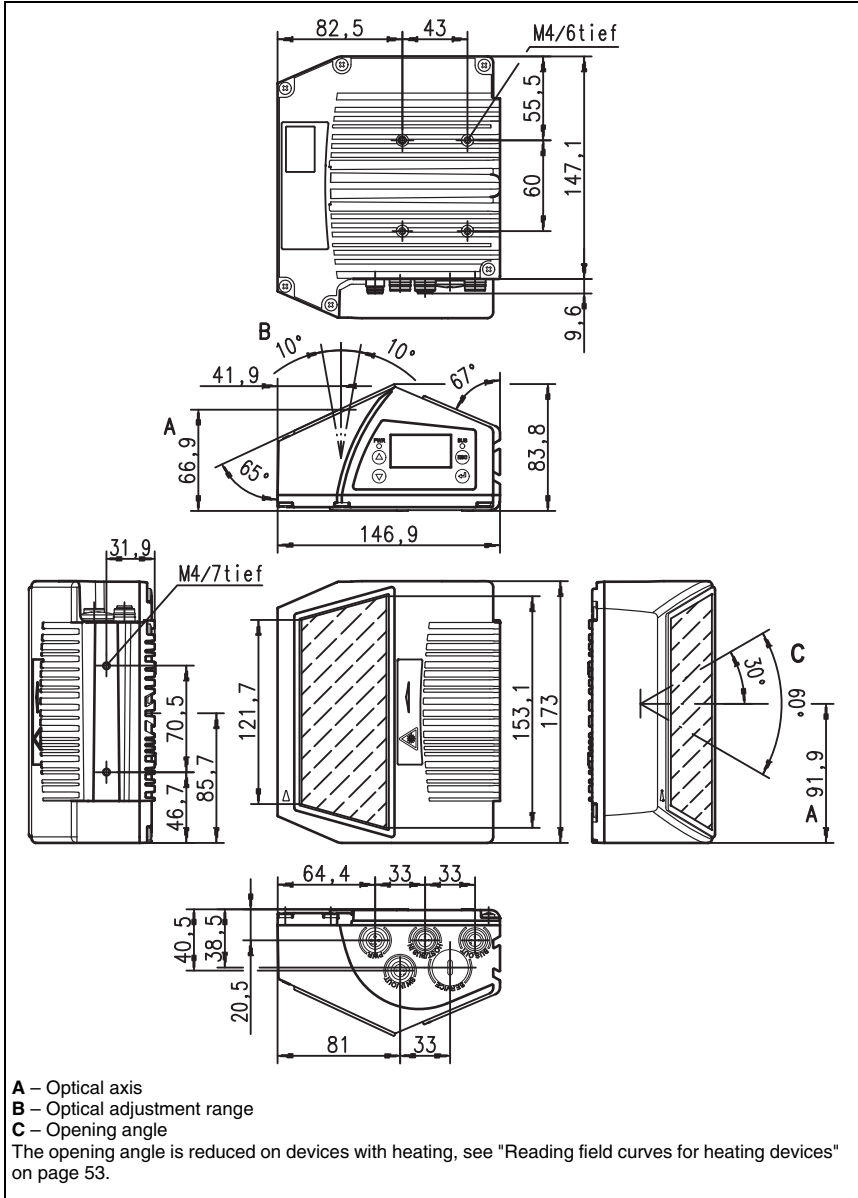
Dimensioned drawing BCL 508*i* deflection-mirror scanner S...100
